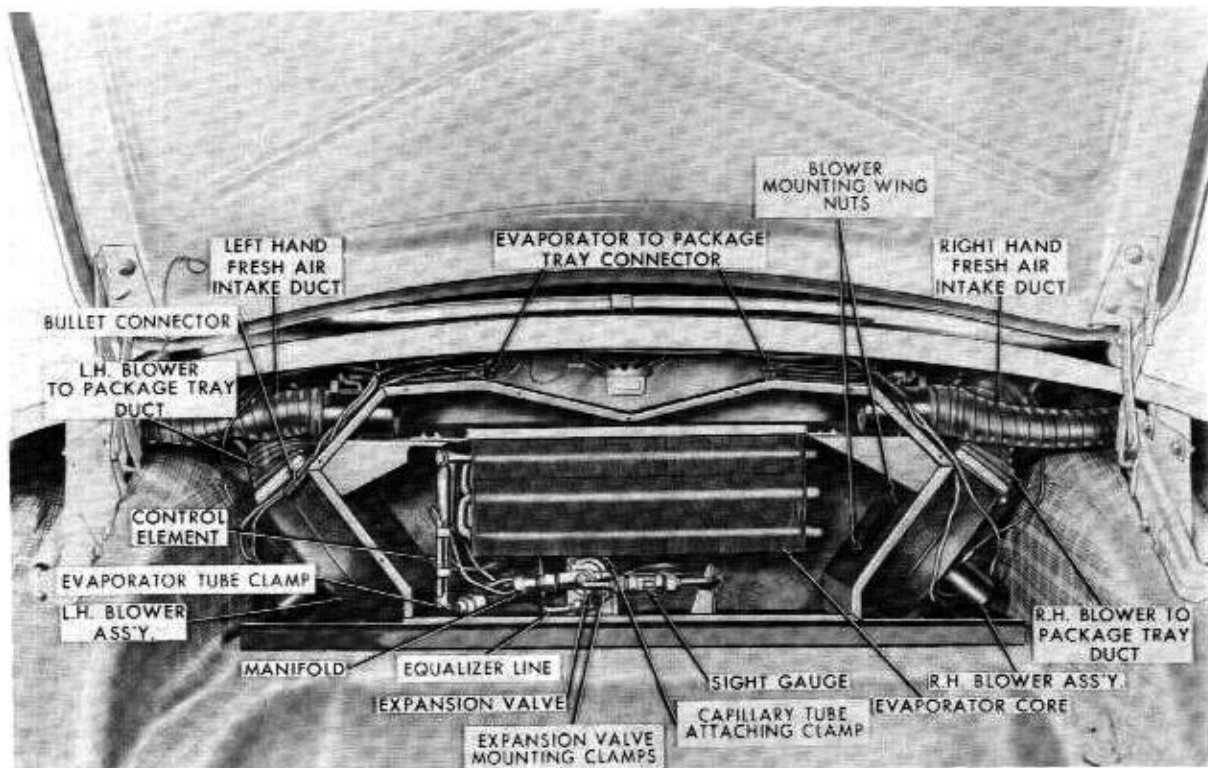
A-5—Overall View of Evaporator Assembly—(4L-737)
